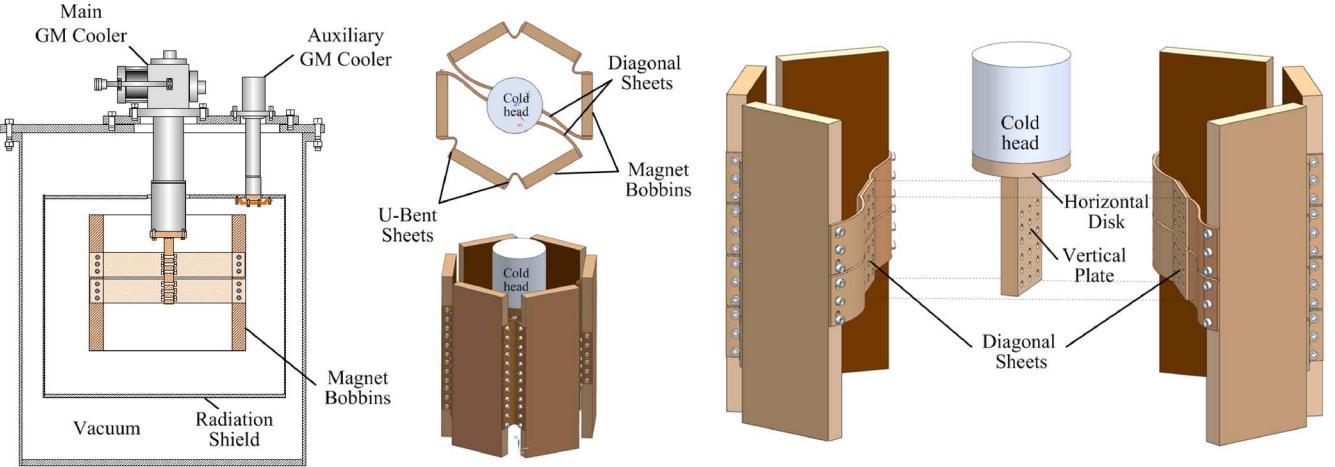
Schematic overview of experimental set-up and graphical representation for assembly of cryogenic parts, including cold-head of GM cryocooler, thermal conductors (composed of horizontal disk, vertical plate, diagonal sheets, U-bent sheets), and six magnet bobbins in hexagonal array.
